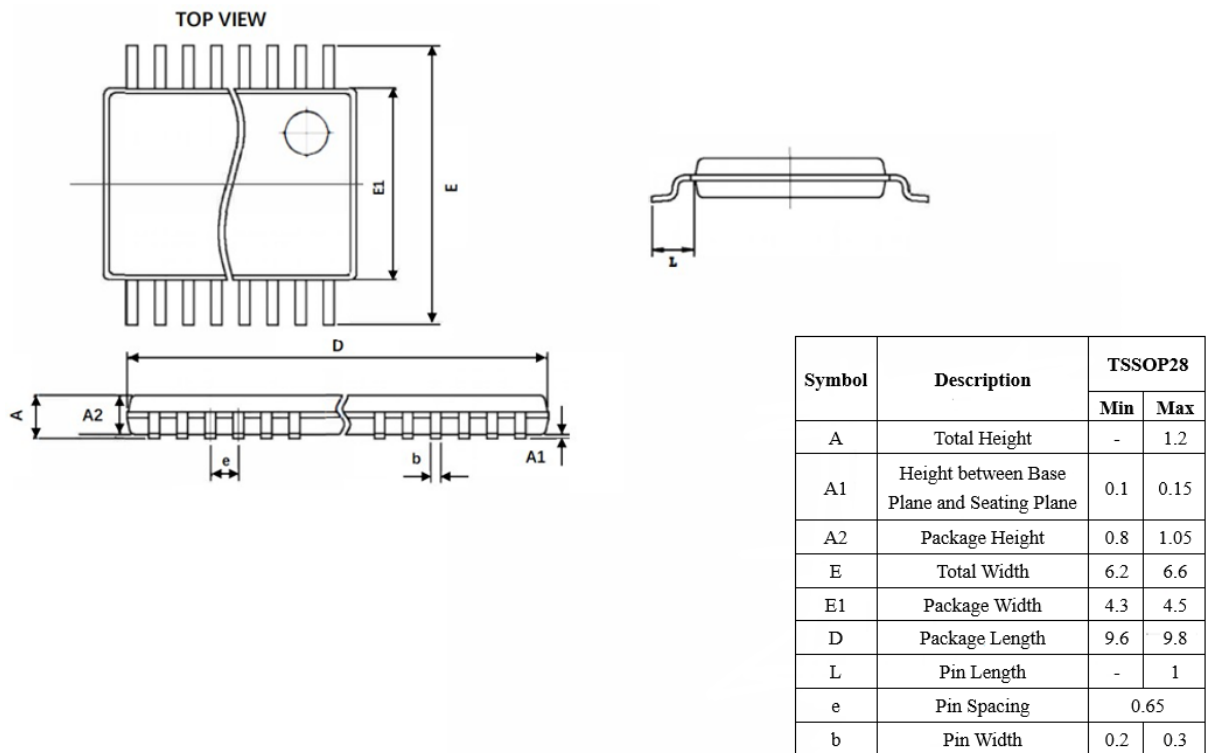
ET8161T TSSOP28LD_9.7X4.4 Package Drawings and Dimensions
